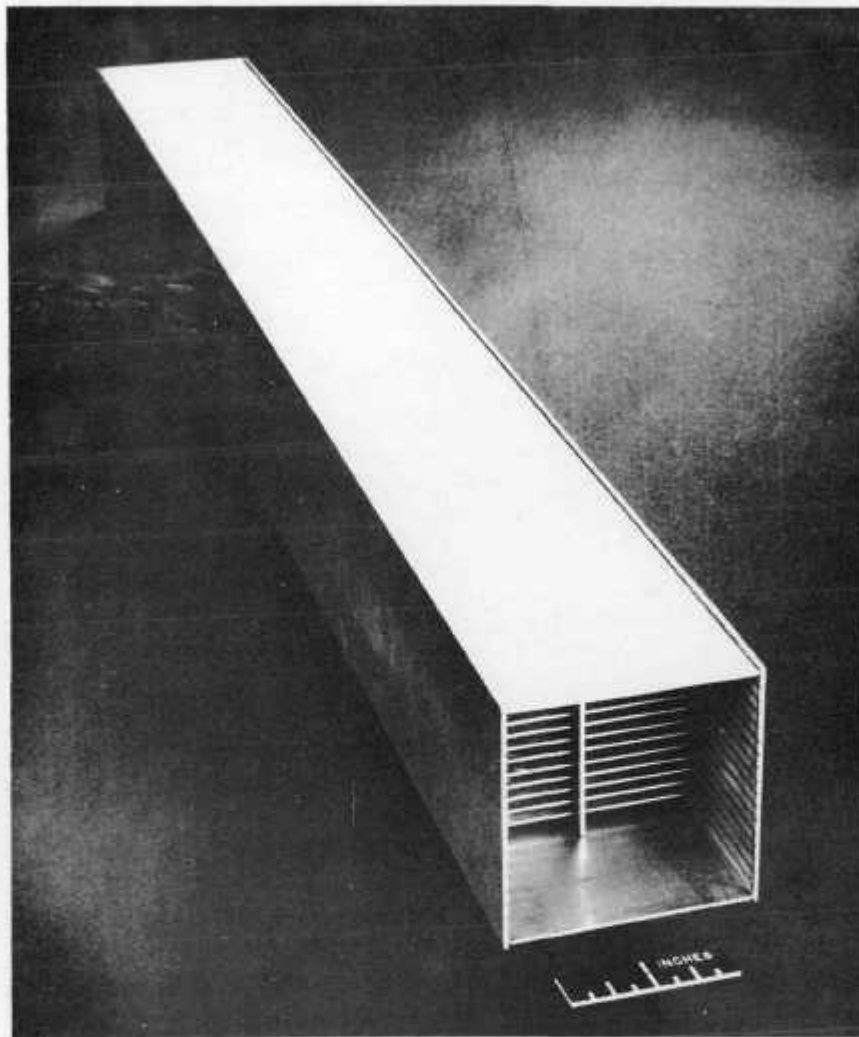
(Y-24067) Brazed Stainless Steel Fuel Assembly Containing Eighteen Flat Composite Stainless Steel Fuel Plates.
